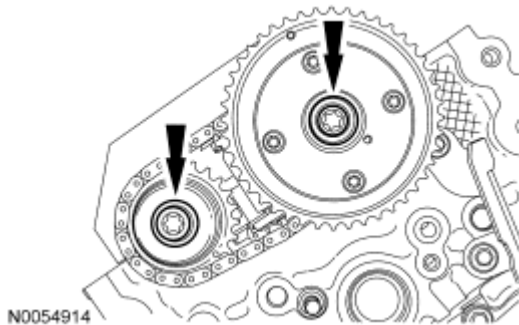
Locating RH VCT Assembly Bolt & RH Exhaust Camshaft Sprocket Bolt
